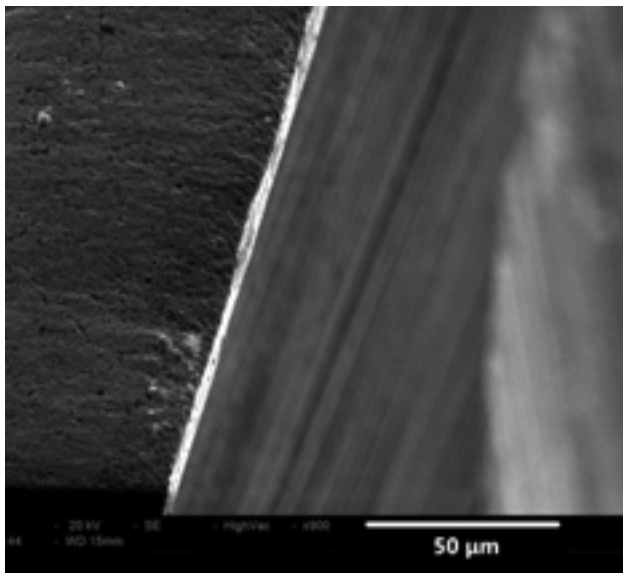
Image of carbide drill after drilling 200 holes showing flank wear.
